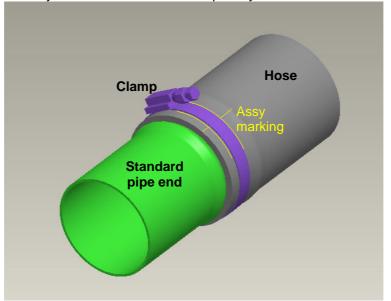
TR instruction describes clamp assembly, if nothing else is specified in drawing.
